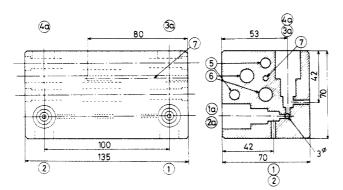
Liquid-phase sampling valve: 1, inlet (cell side); 2, outlet (cell side); 3, inlet (flash-tank side); 4, outlet (flash-tank side); 5, cooling air hole; 6, cartridge heater hole; 7, thermowell. (The "a" denotes a valve seat.)
